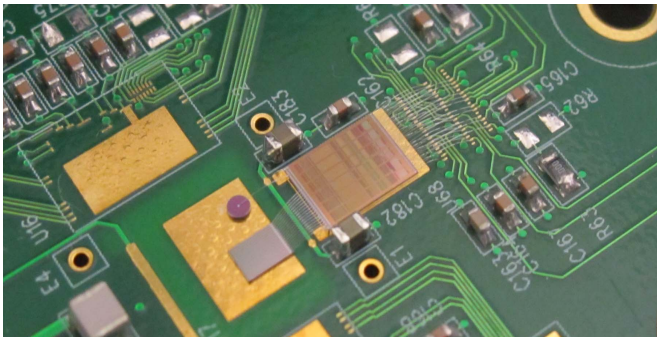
eLine100 spectrometer: detail of the sensor-ASIC assembly.
